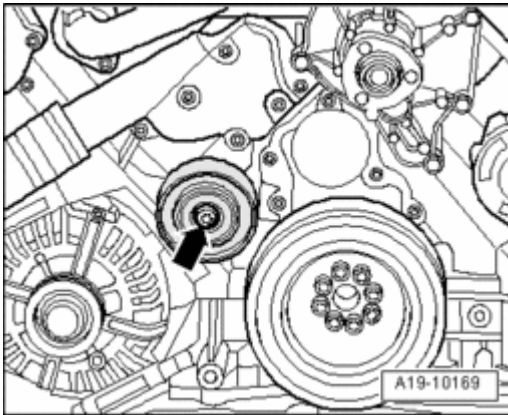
Removing Bolt And Disconnecting Idler Roller
